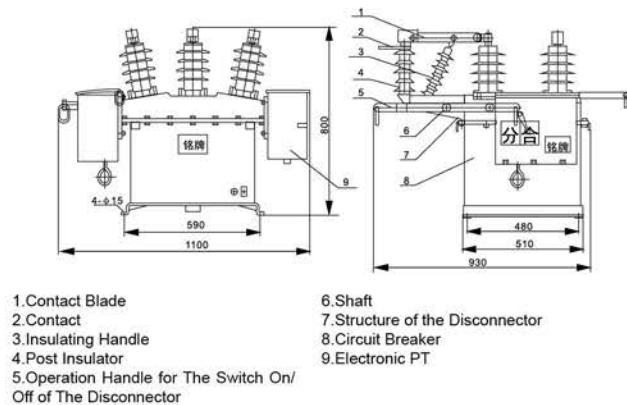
Outline Drawing and Mounting Dimensions of ZW8-12 with disconnector breaker
